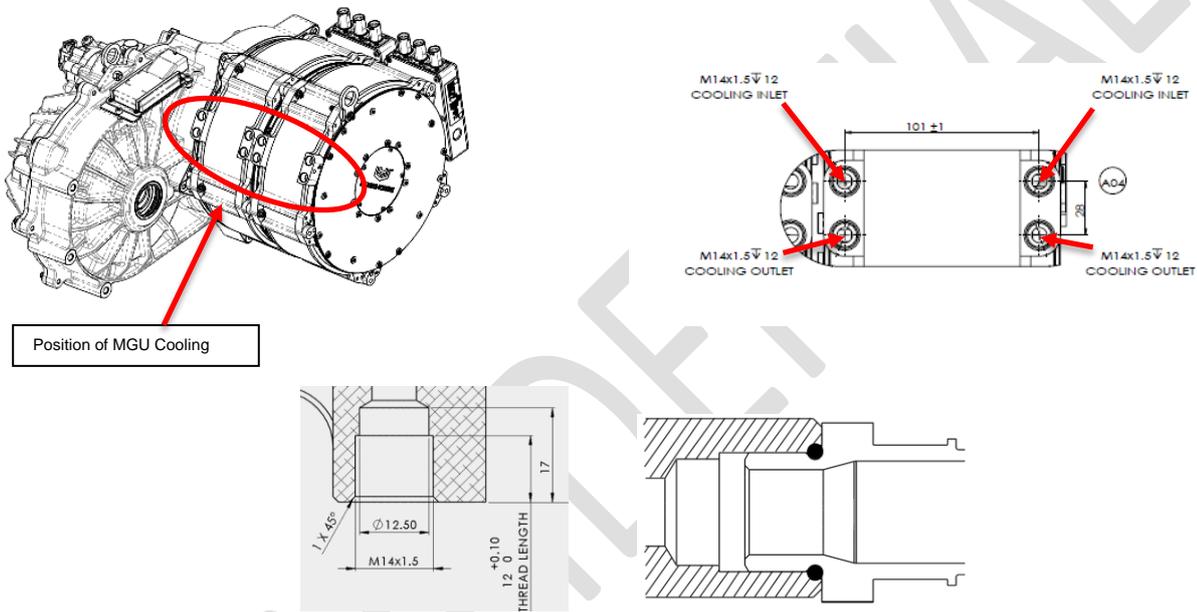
M14 cooling port fitting with 1x45° chamfer and 12.42x1.78mm ISO 3601-1 O-ring
